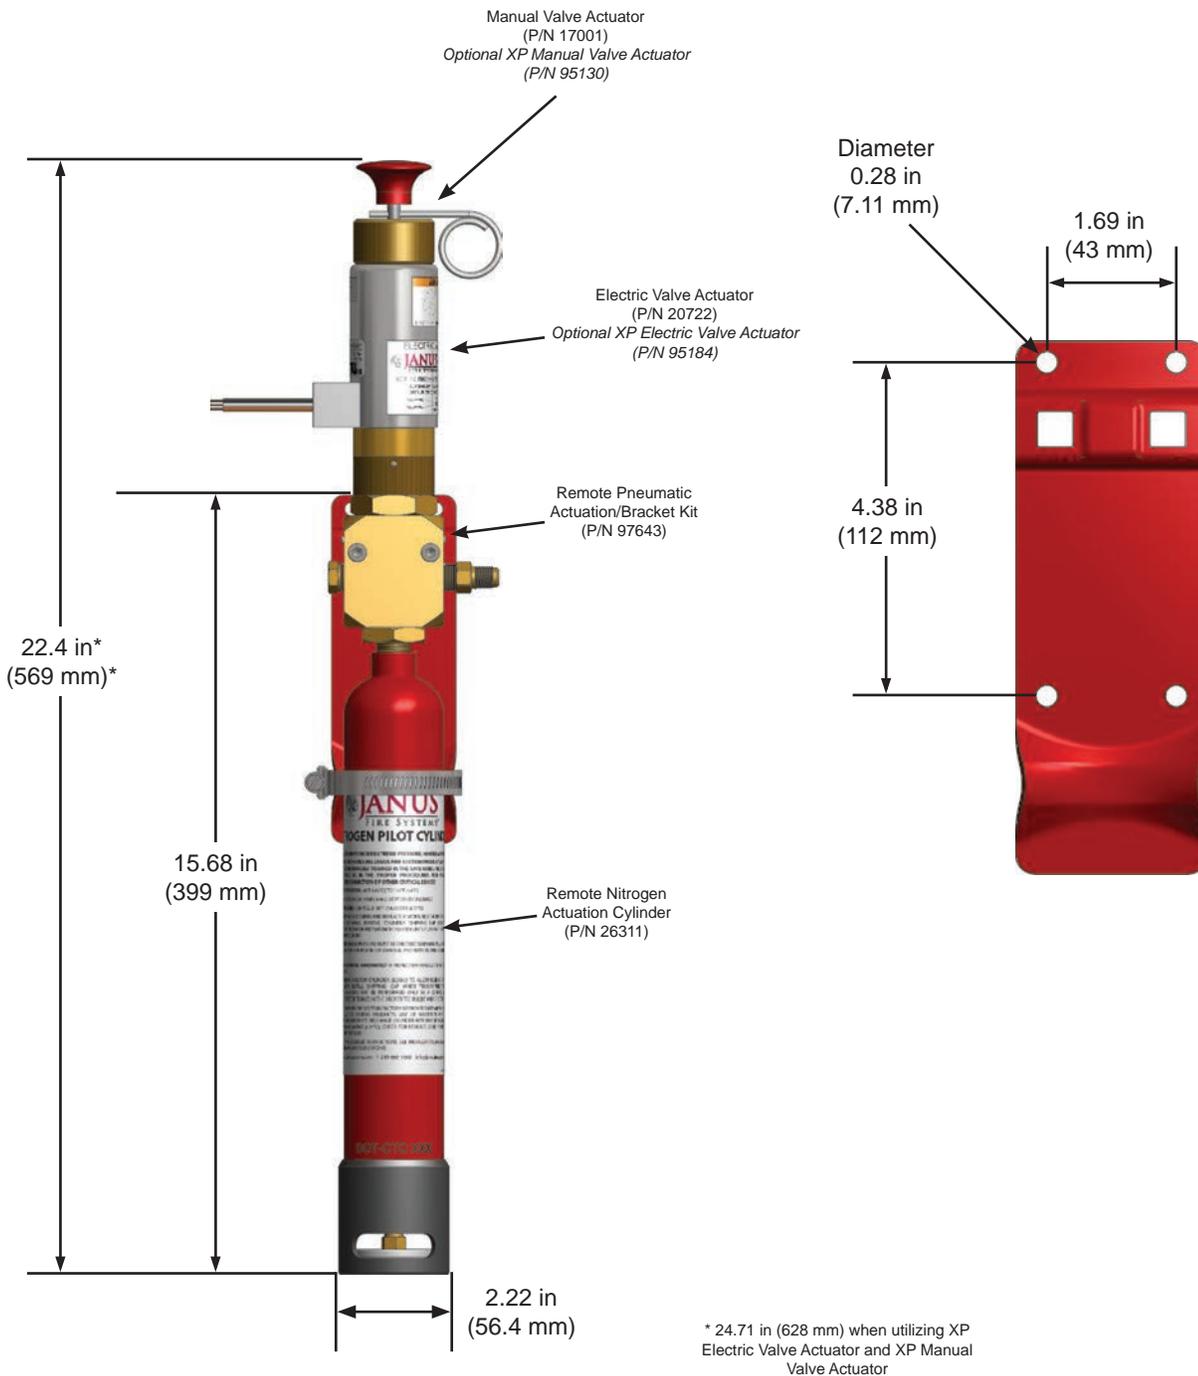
Remote Actuation Kit/Bracket Dimensions
